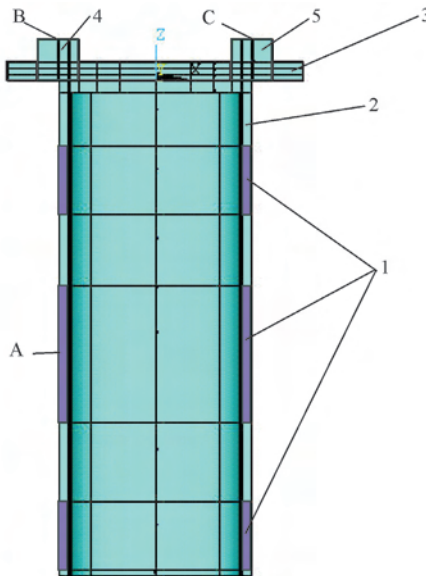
The schematics of geometry of the assembly valves-magneto-electric drive, configuration 1, for the analysis of dynamic parameters of assembly motion; 1 – coil winding, 2 – coil form, 3 – connecting element, 4, 5 – valves; A, B, C – points for calculation of parameters of motion
